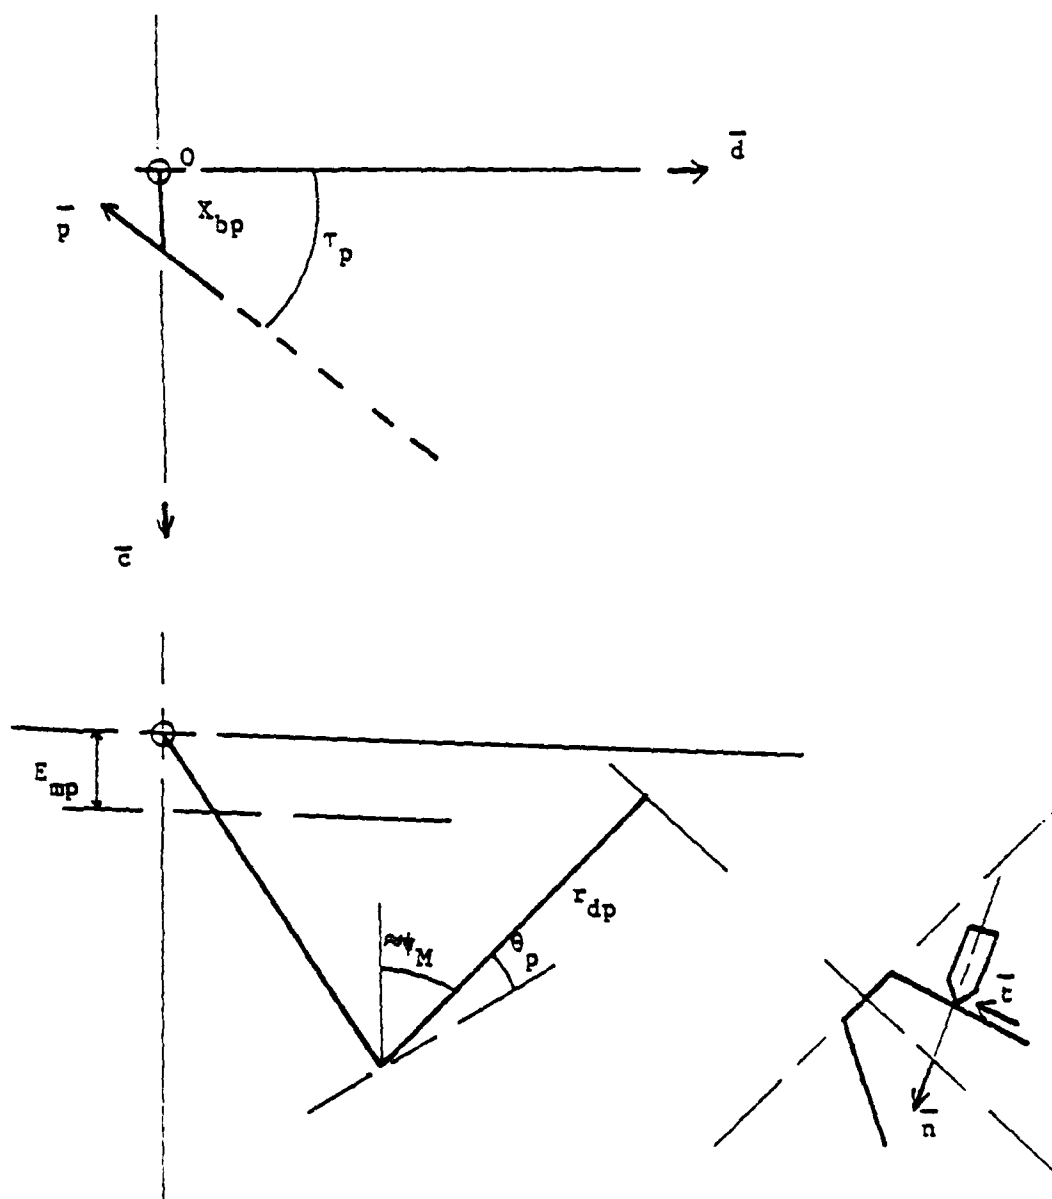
Position Vectors in Machine Plane (Pinion)
